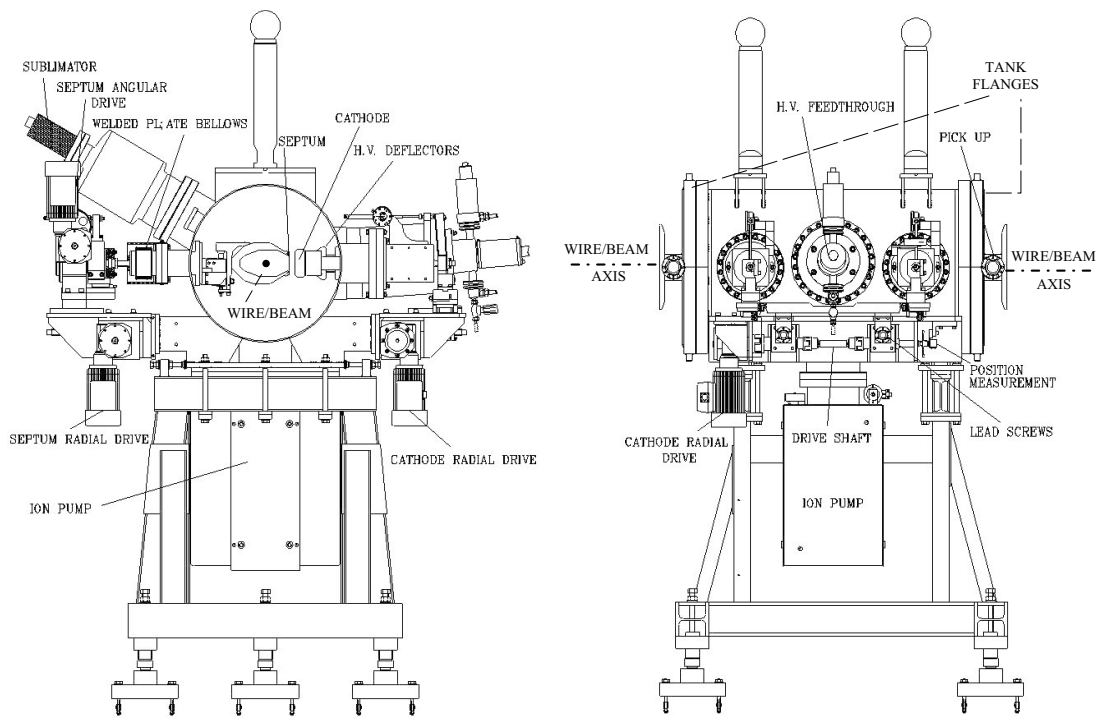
Simplified drawing of the whole septum. The left picture gives a transverse view of the device: the quasi-elliptical vacuum chamber inside the septum tank is clearly visible. The right picture is a view “parallel” to the beam axis. The wire for the bench measurement is aligned at the centre of the circular tank flanges (which does not necessarily correspond to the centre of the elliptical chamber).
